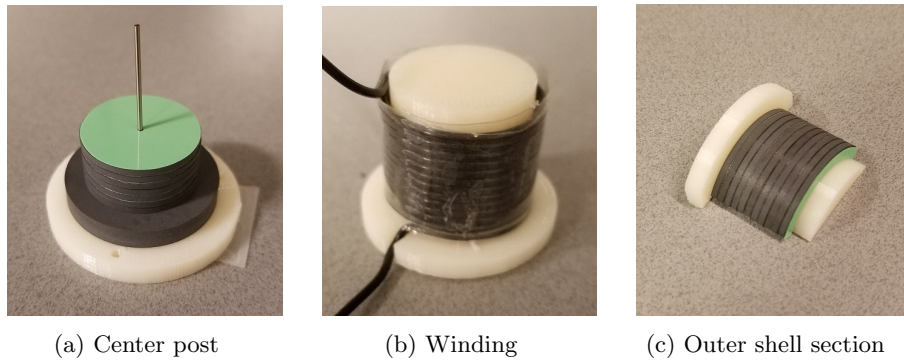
Construction of the prototype inductor using custom 3D-printed fixtures (white).
